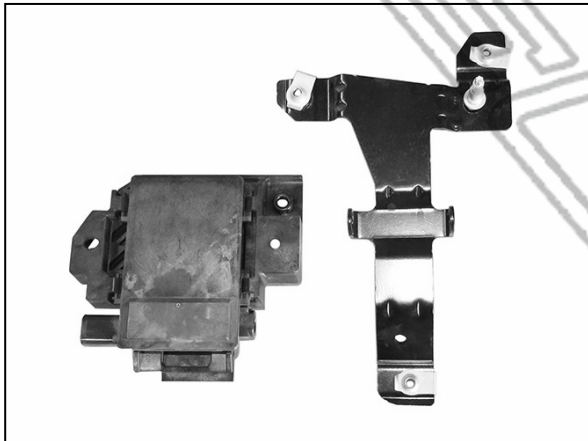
Insert sensor assembly into the sensor mount on back of Bumper
